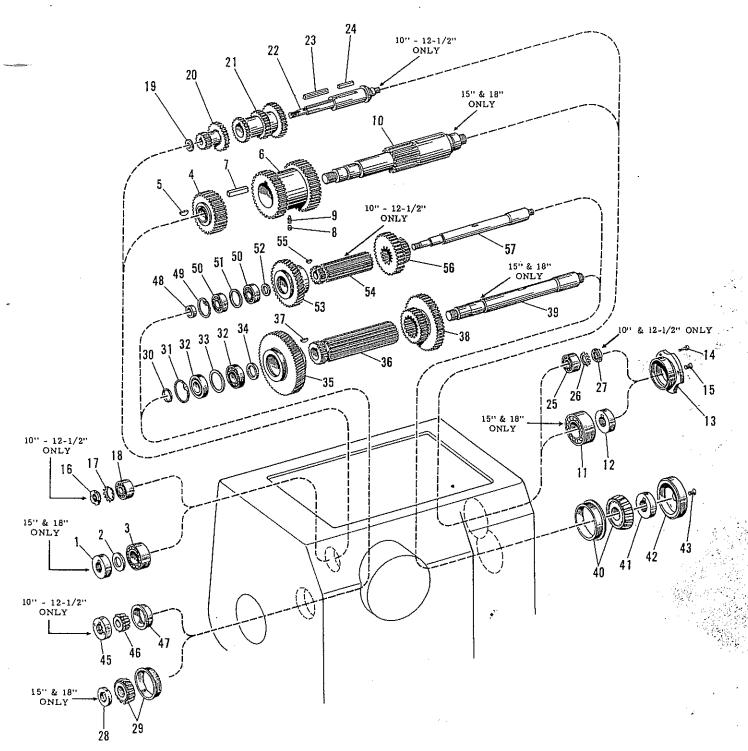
Headstock - "B" & "C" Shaft Assemblies
